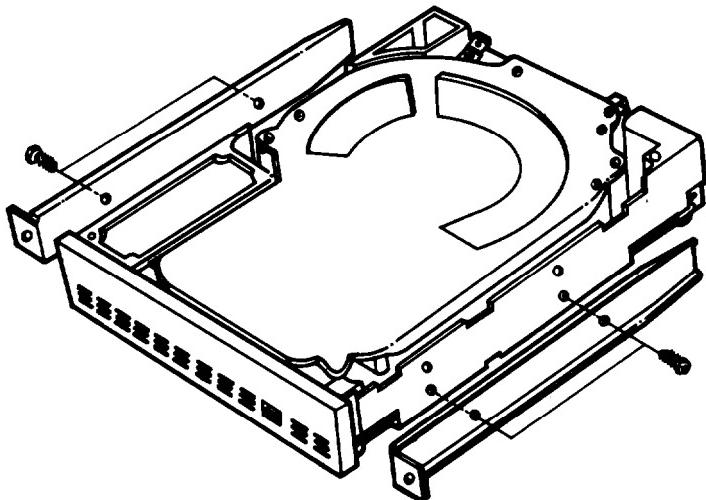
Attachment of the guide rails to the Hard disk drive
